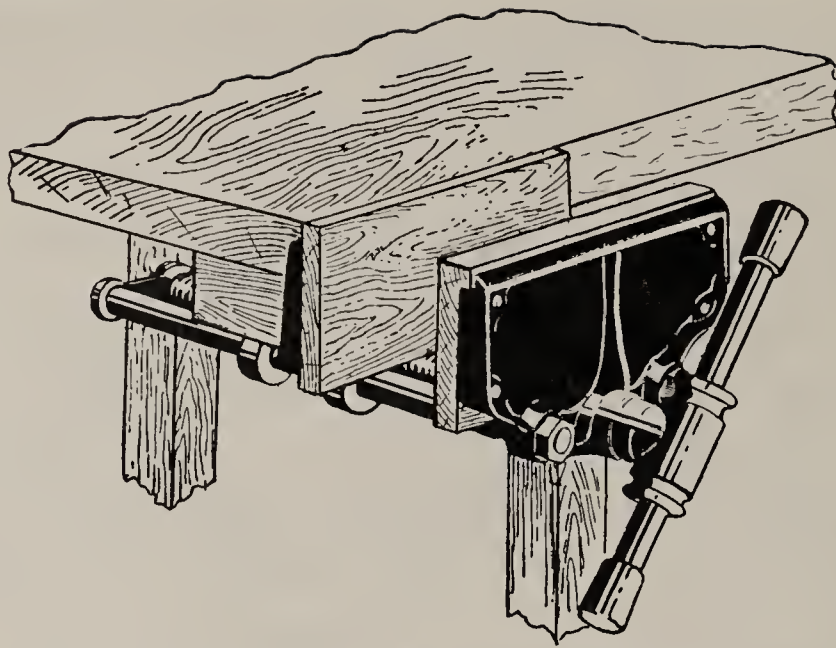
Method of attaching vise to the workbench. In construction, the inner jaw is fastened to the bench and supports a fixed nut in which the screw rotates. This screw controls the outer jaw which has attached to it two rods working in sleeves and keeping the jaws parallel for all positions of travel.
